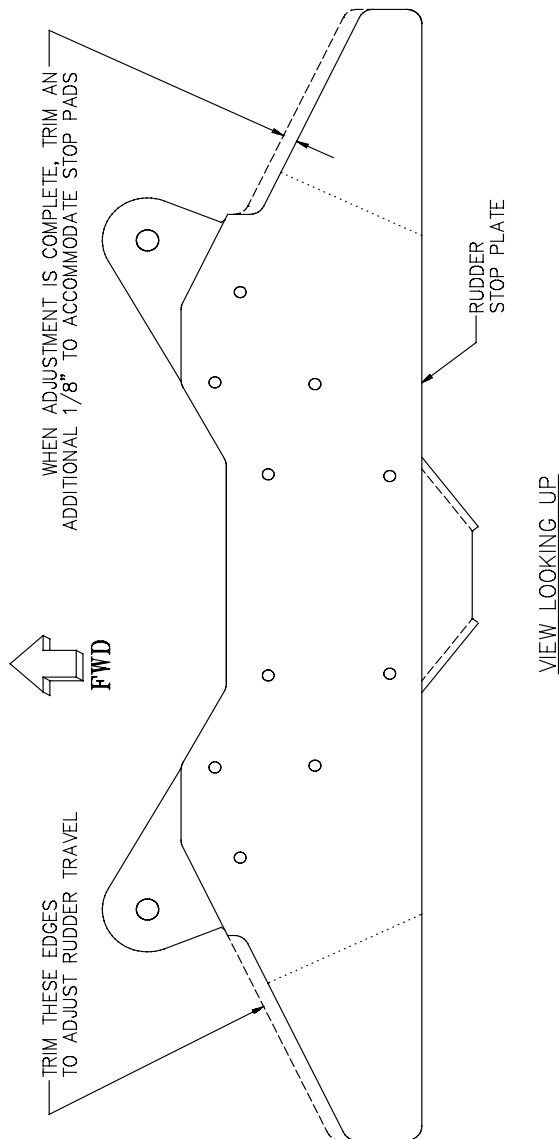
Drilling the Rudder Stop Plate Rivet Holes
